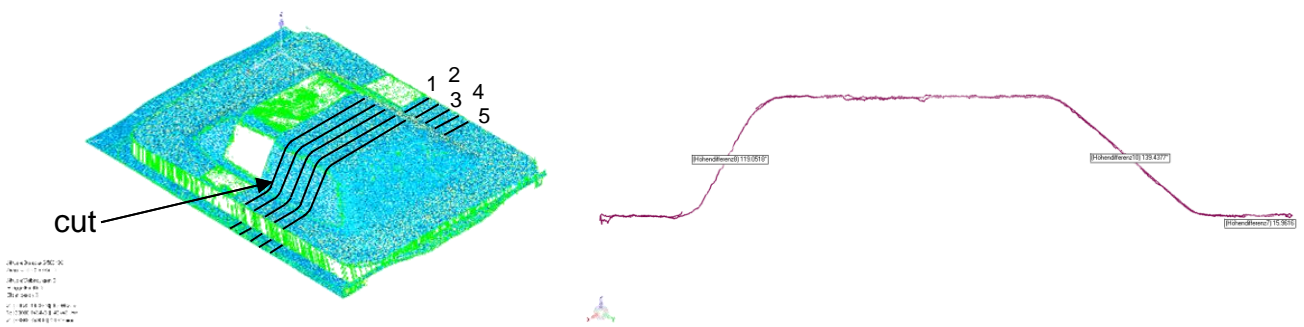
Cured test object with five defined planes (left) and cross-section (right)
